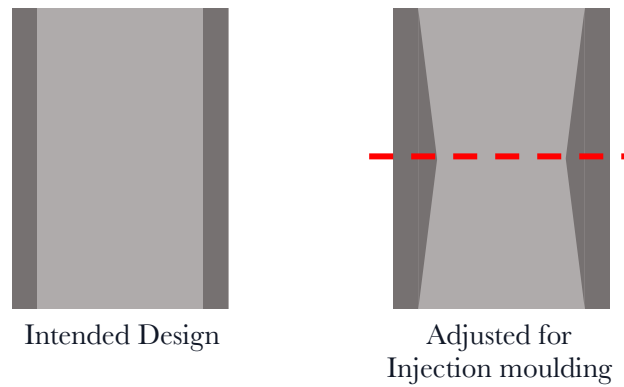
Simplified figure illustrating draft angles to optimise removal from mould.
